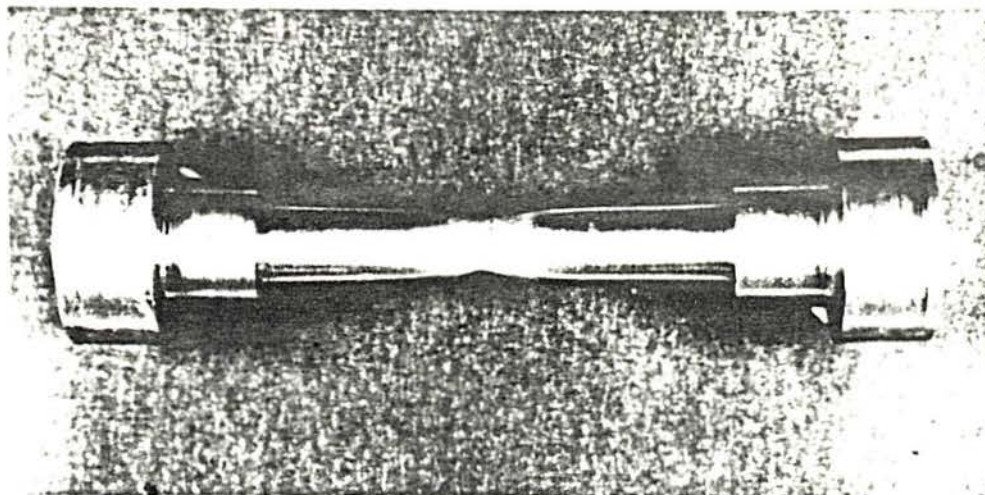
(a) All Weld Metal Tensile Specimen Pieces Assembled After Test. X 1.
